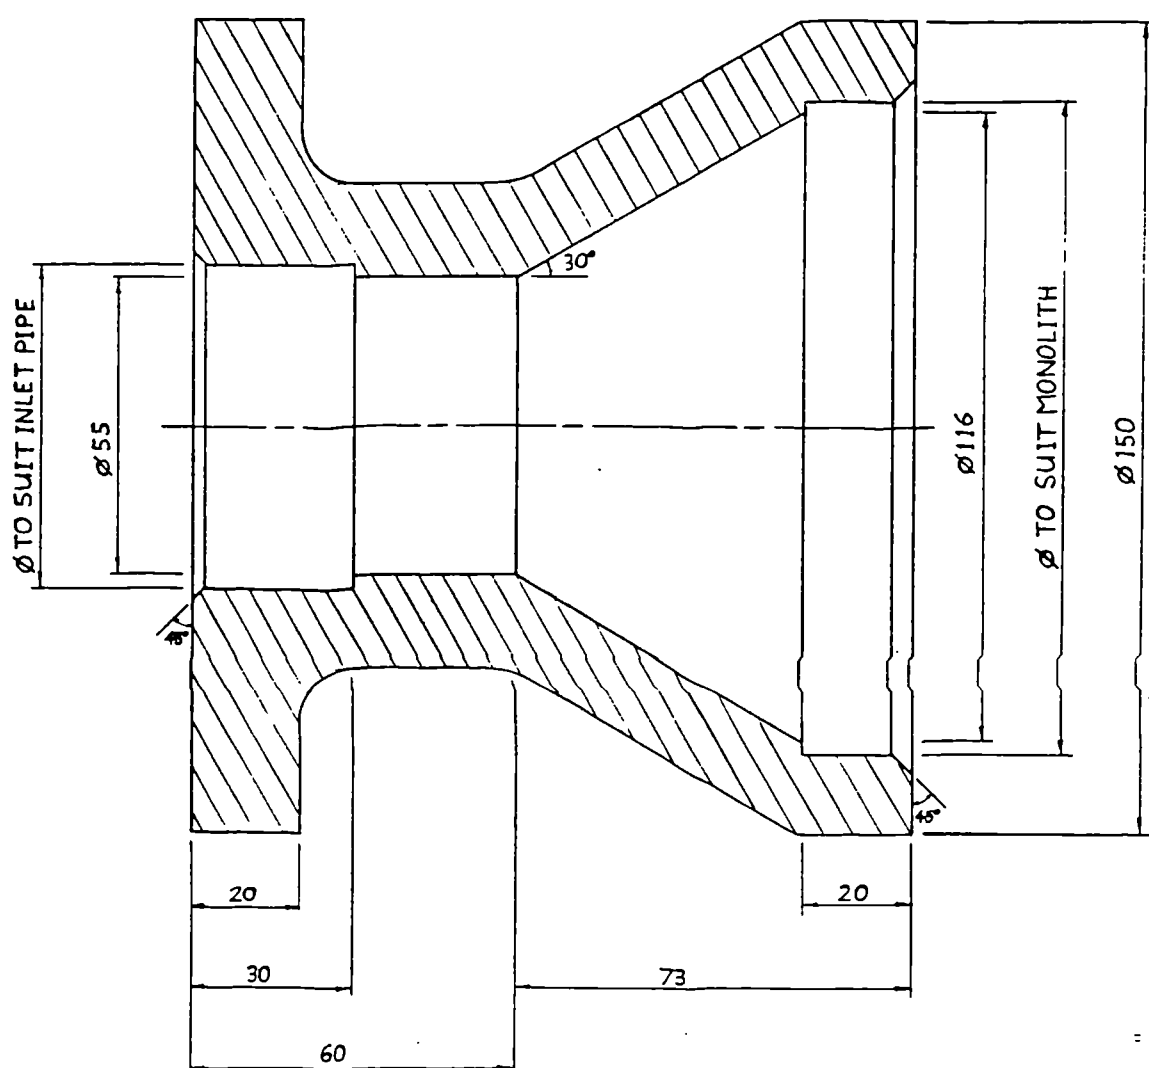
Sectioned drawing of 60° diffuser (dimensions in mm)
